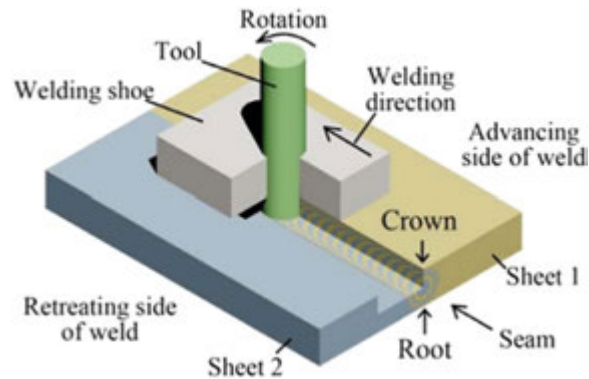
Schematic of the FSW for polymers with PTFE welding shoe. Reproduced from Eslami, S., Tavares, P.J., Moreira, P.M.G.P., 2017. Friction stir welding tooling for polymers: Review and prospects. *The International Journal of Advanced Manufacturing Technology* 89, 1677–1690.
